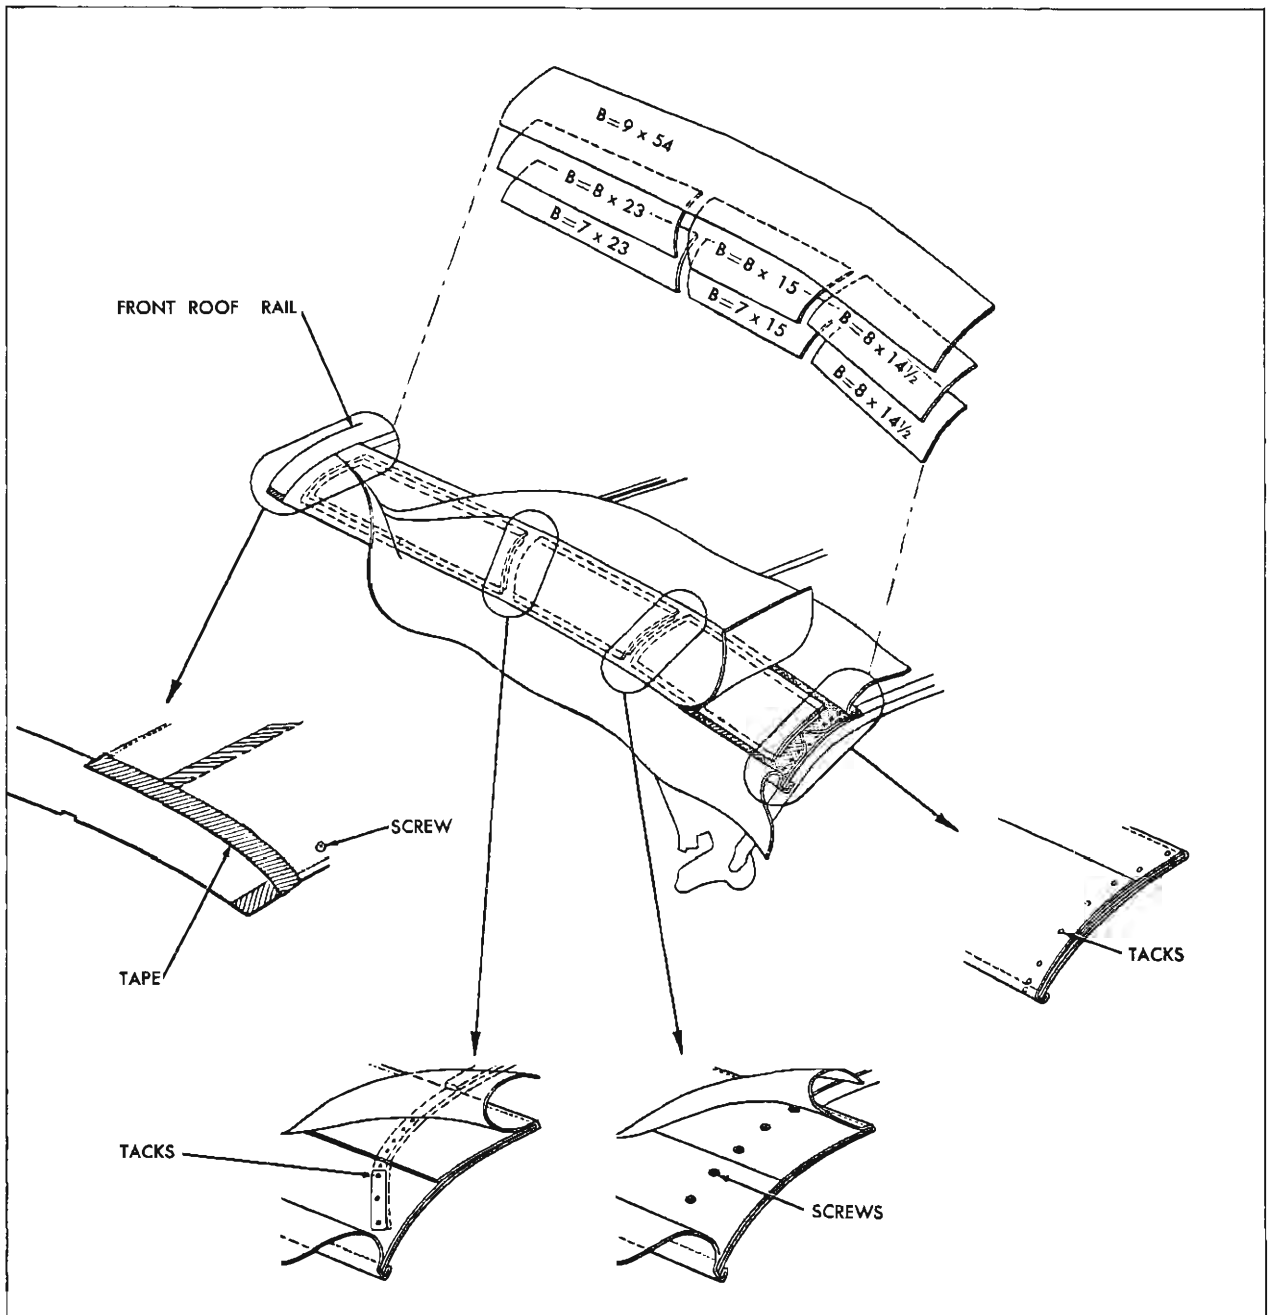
Installation of Side Stay Pads (Pontiac Styles)
